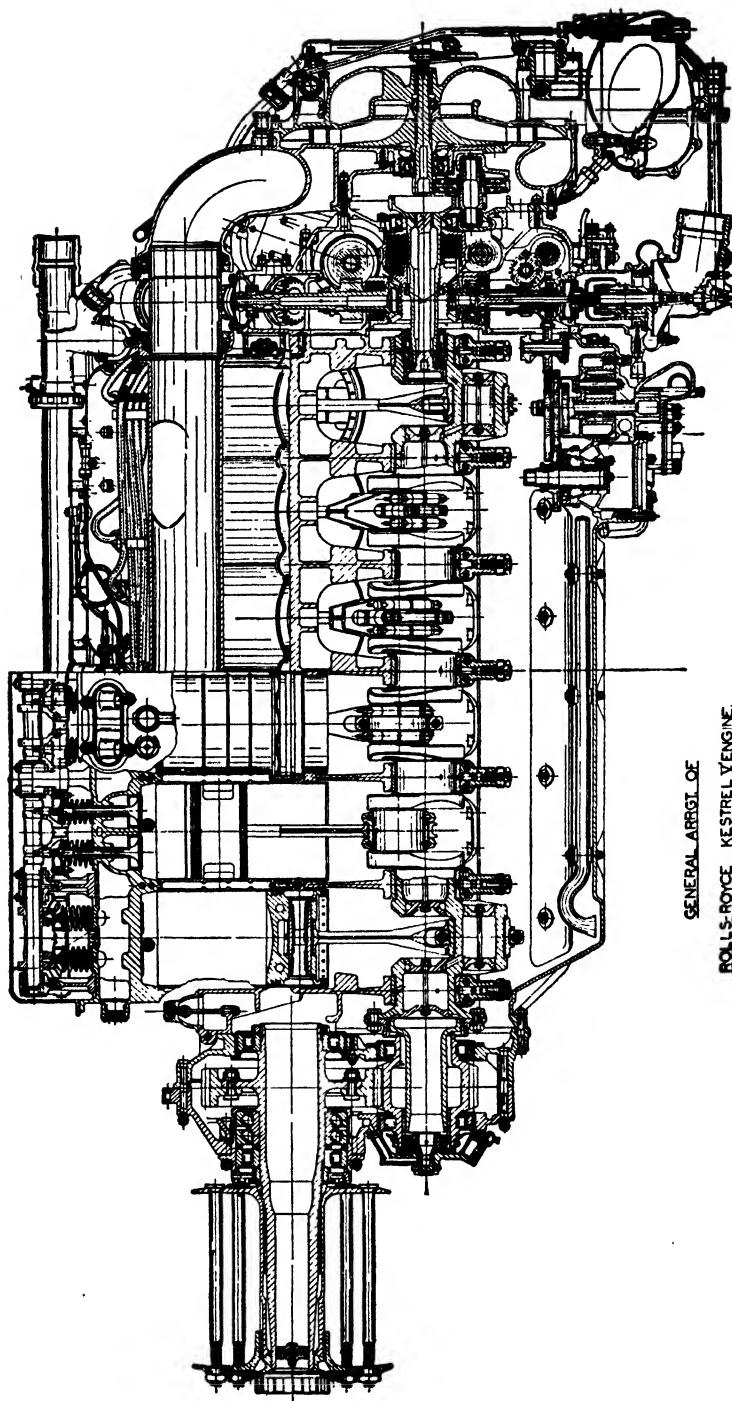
Sectional View of Supercharged Kestrel Engine.
